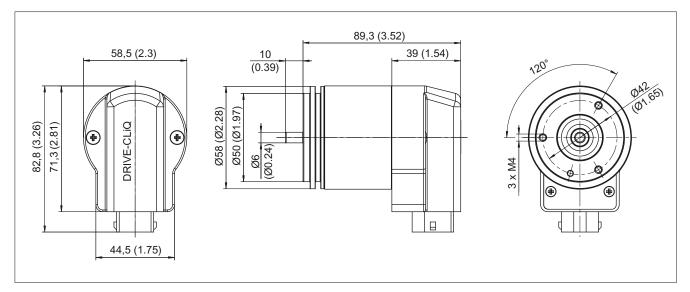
Dimension drawing of synchronous flange, all data in mm and (inches)
